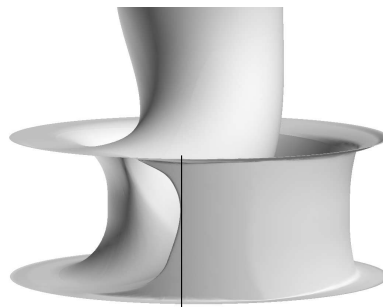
Impeller angle is 0° when tip of the impeller blade is passing a plane from measurement point 1 to center of the impeller.
